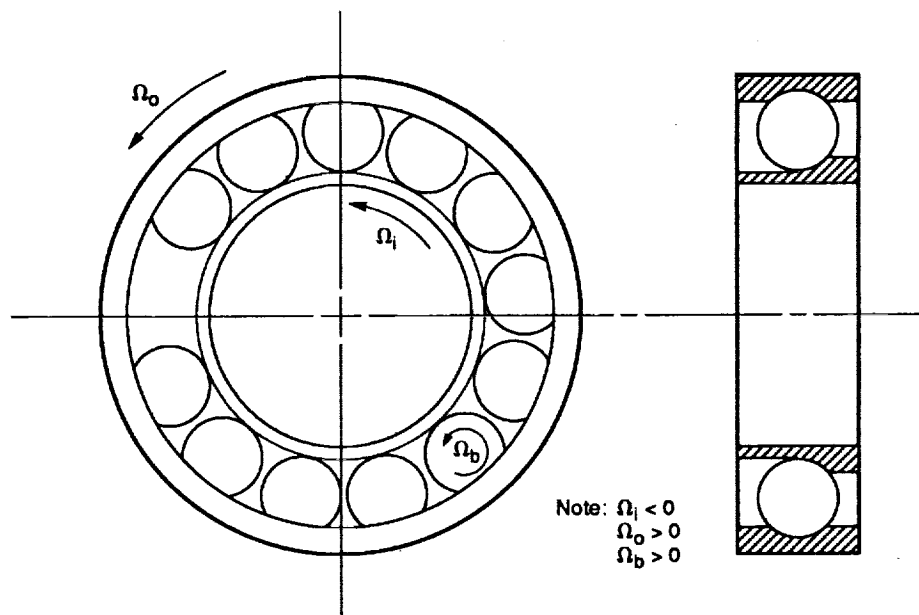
Geometry of an angular contact ball bearing with a full ball complement.
